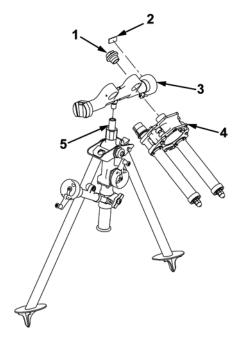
Disassembly of Recoil Mechanism Buffer and Traversing Mechanism.
